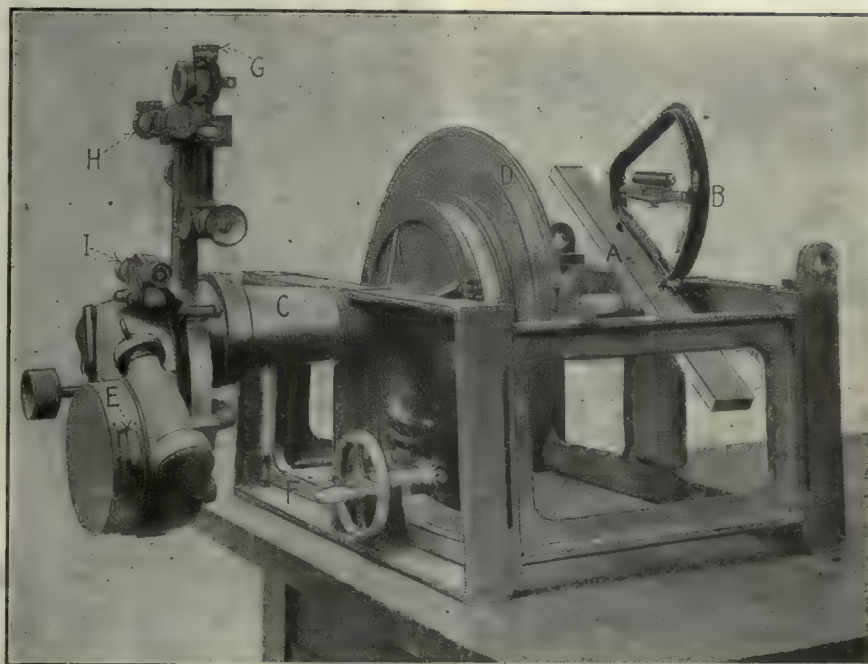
FRENCH GUN SIGHT MOUNTED ON FALSE GUN FIXTURE
